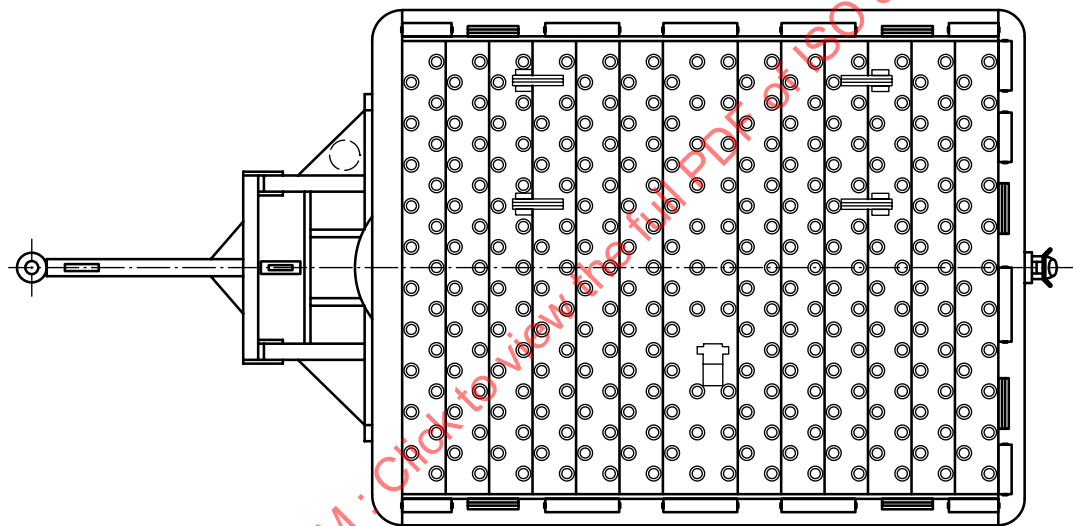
Container/pallet dolly, end towing side, ball transfer unit
